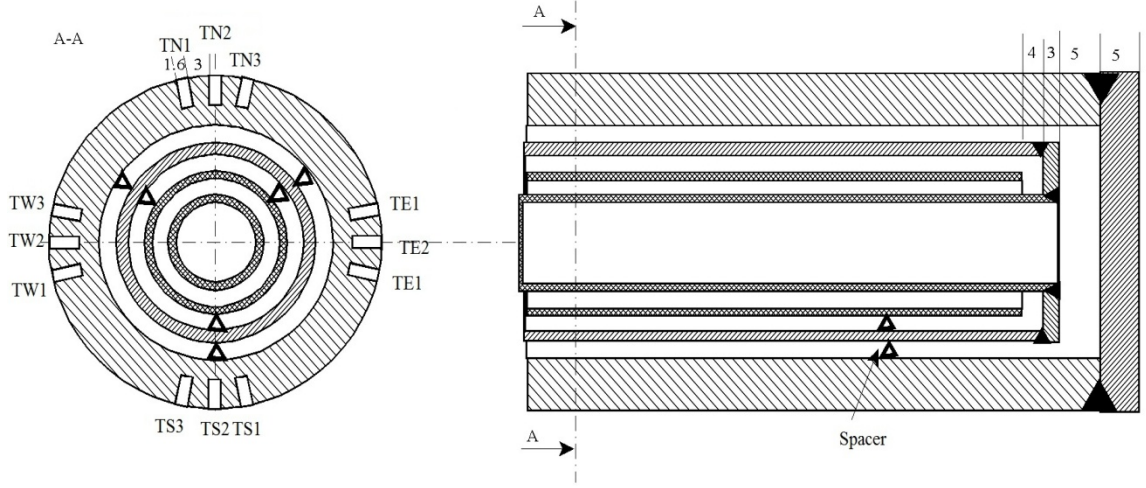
7: Cross-sectional view perpendicular to probe axis and cross-sectional view along axis of annuli.
